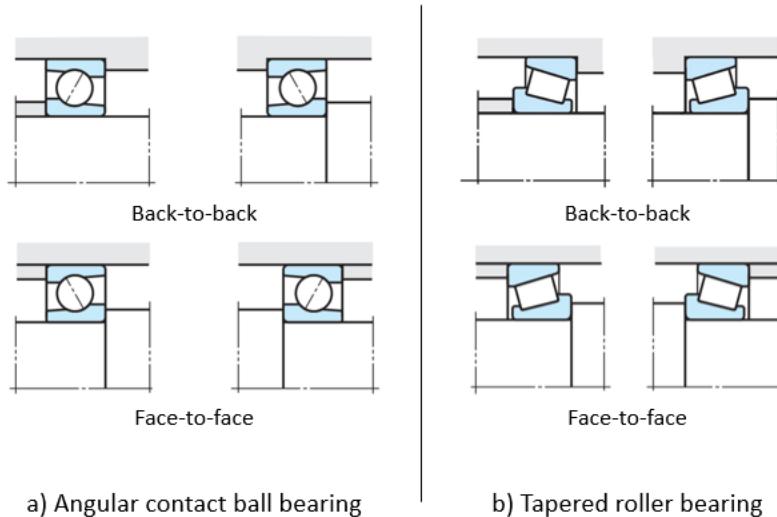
Face-to-face and back-to-back tapered roller bearing [21]
